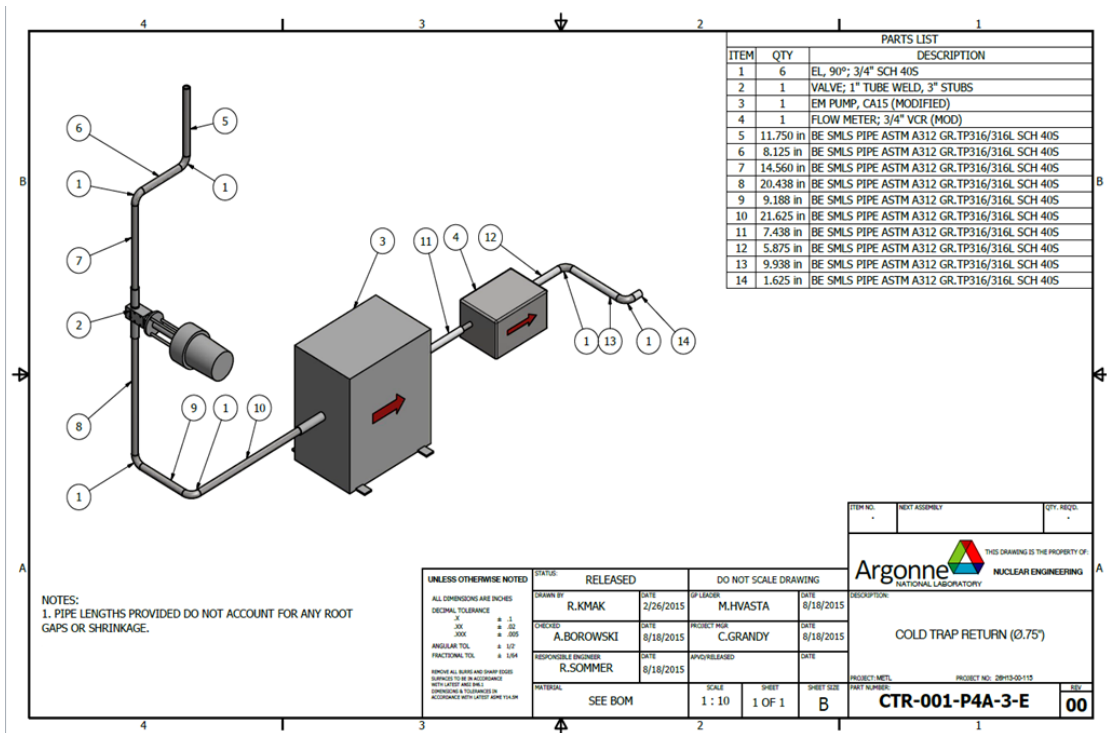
A sample piping ISO produced by ANL. This updated ISO gives Central Shops the required dimensions of the piping and equipment prior to installation.
